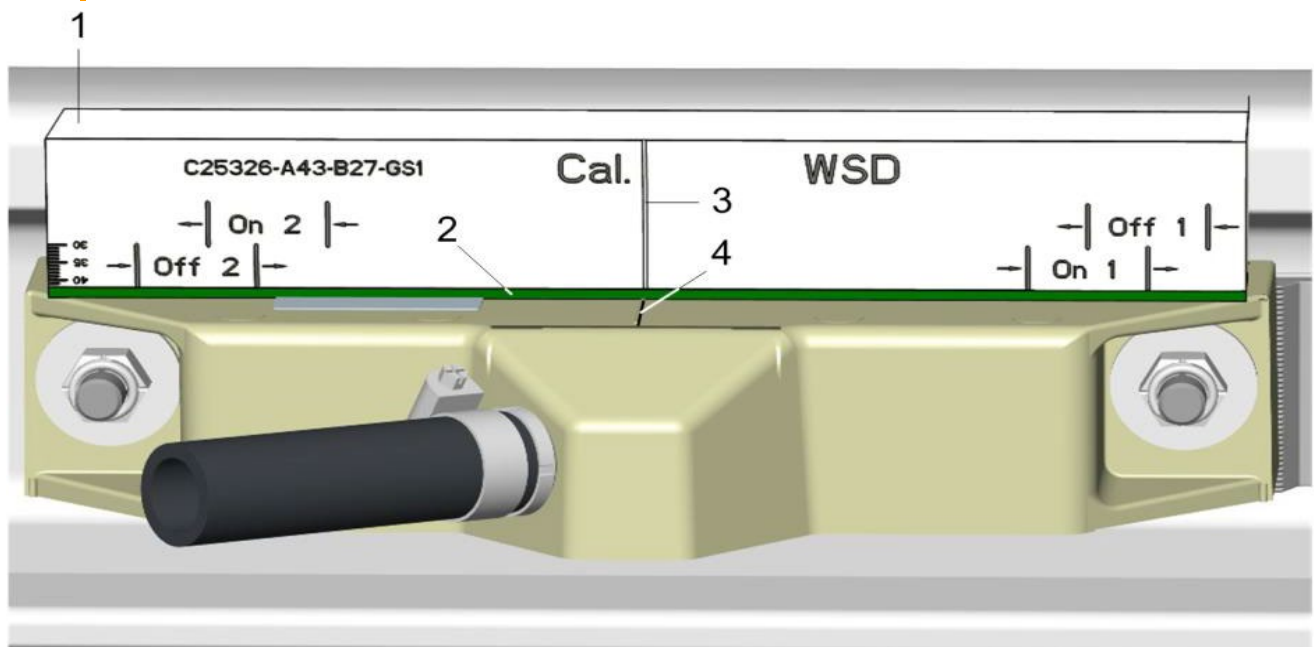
Positioning of the adjustment gauge on the wheel detector
